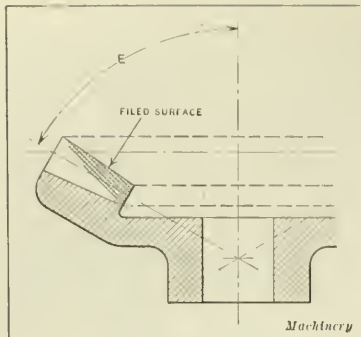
Filed Surface of Milled Internal Bevel Gear Teeth
